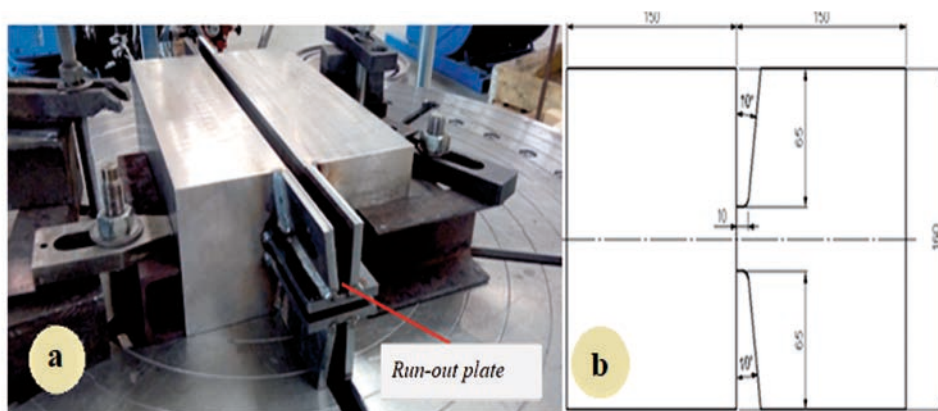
Preparation of elements for submerged arc welding test. a) Elements (plates) prepared for welding (with run-out plates); b) Schematic cross-section of elements connected with the submerged arc welding method
